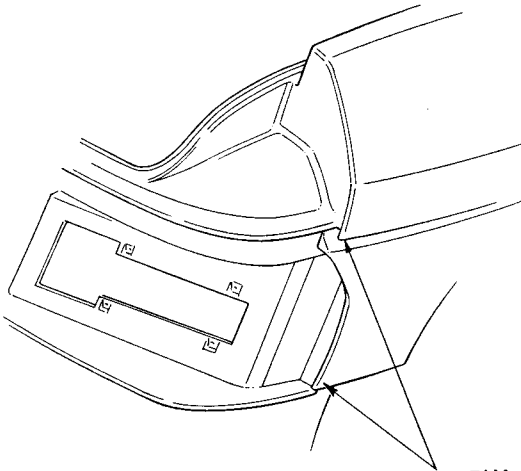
Rear Lower Quarter Bonding
